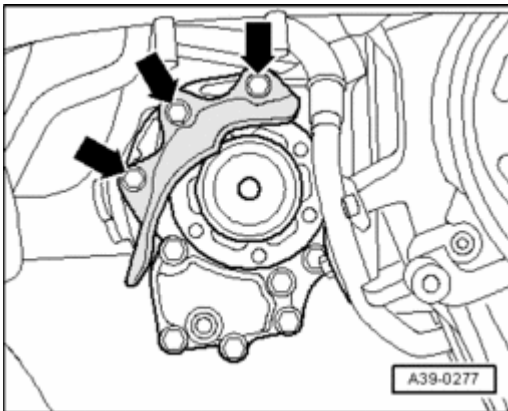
Removing Right Driveshaft Heat Shield From Bevel Box
